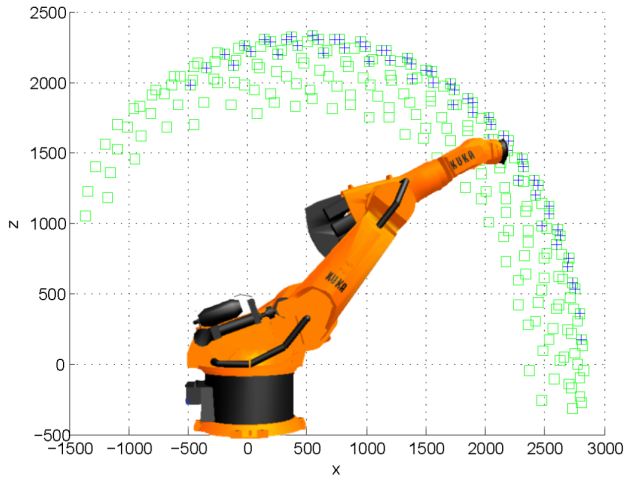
Sectional drawing of the workspaces of a RoboCoaster (plus signs) and a KR500 (rectangles) at $q_1 = 0$
